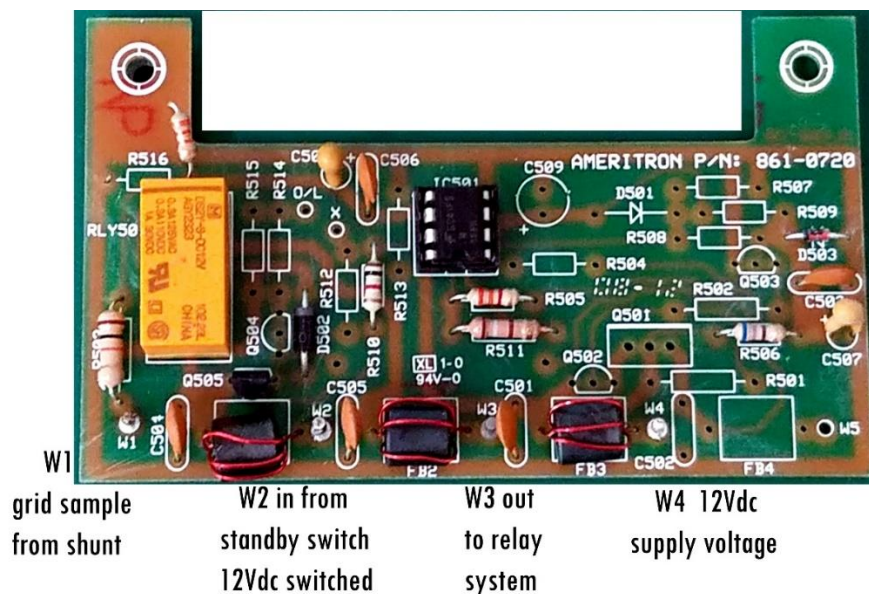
Overload only shown. This board is sold as "GOP" by omitting timer components
